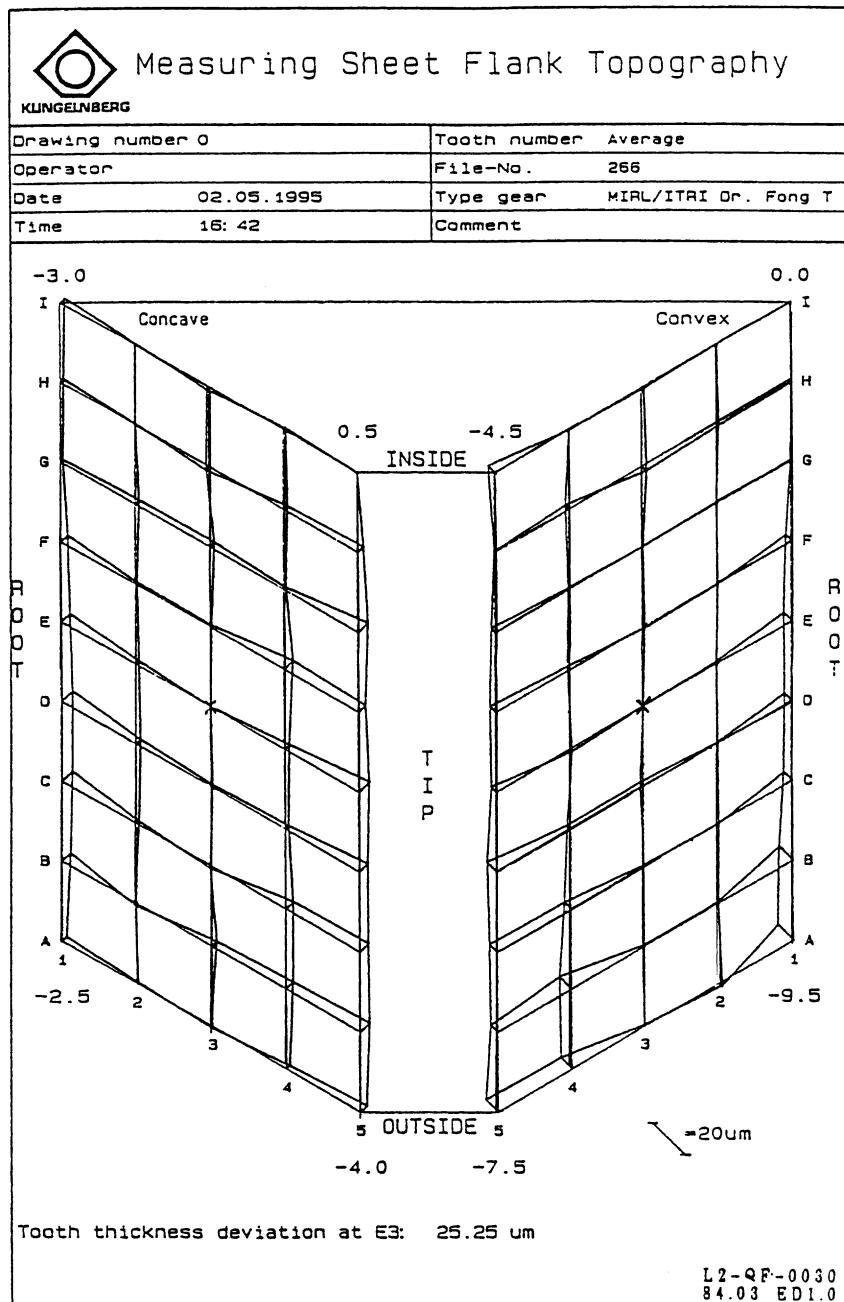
Surface deviations of a gear cut using corrective machine-tool settings.
